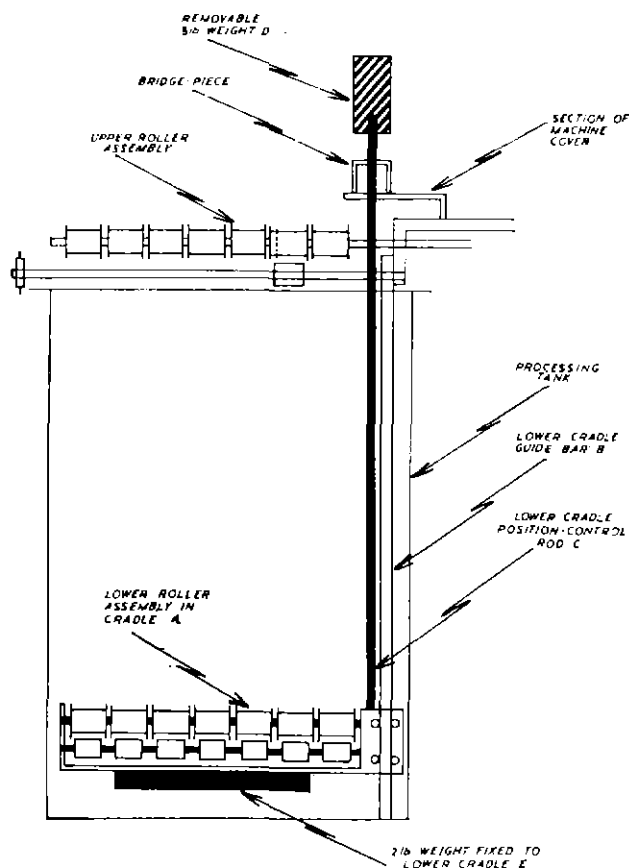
Arrangement of fixed and removable tensioning weights in the processing tanks
